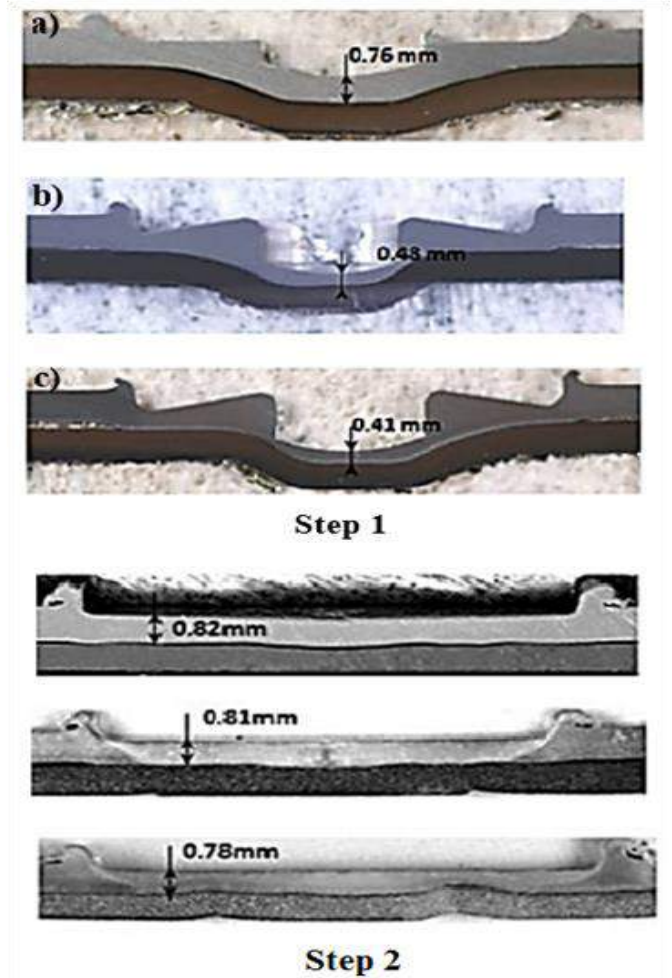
Cross-sectional macrostructure of the welds after the first and second steps. (a) Probe length = 1.0 mm; (b) probe length = 1.3 mm; (c) probe length = 1.5 mm [19]
